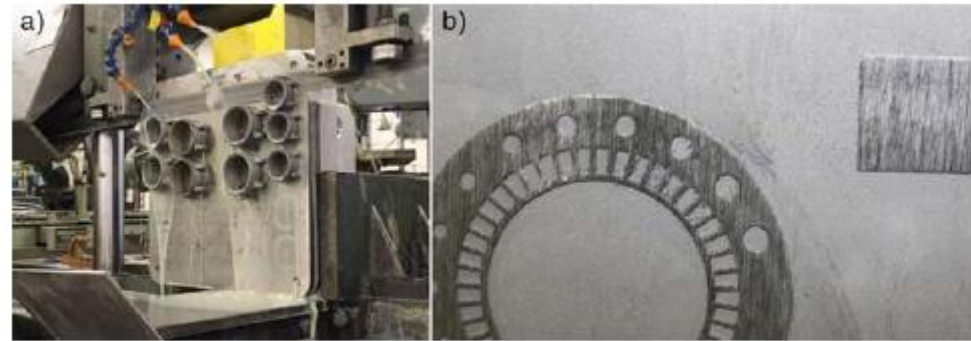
a) Band saw cutting parts from build plate. b) Build plate surface after parts removed.
